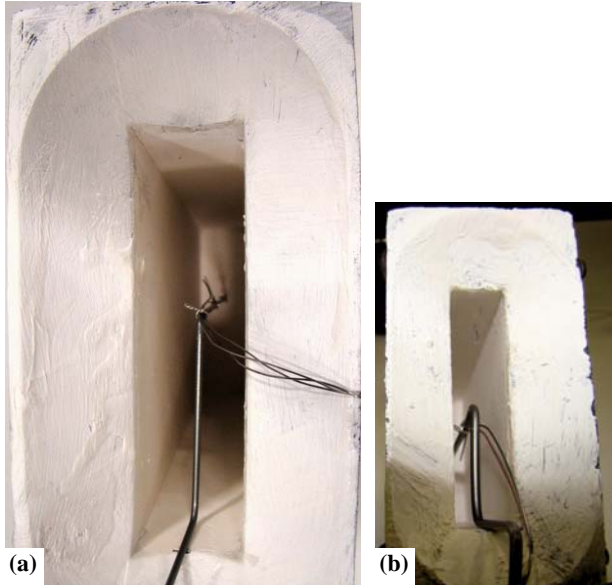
Top view of empty molds showing thermocouple fixtures. (a) mold type C, (b) mold type A (same scale).
